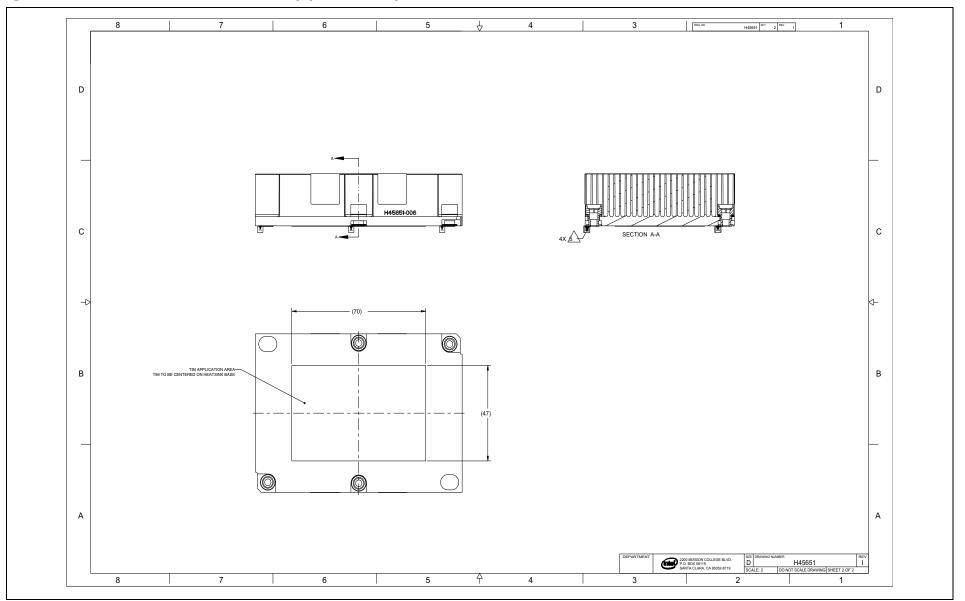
1U Extruded Heatsink (Sheet 1 of 2)
